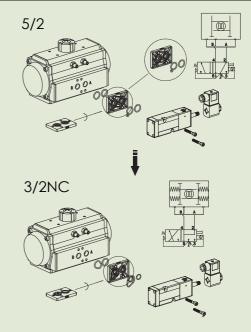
Non-standard installation diagram and photo of NAMUR solenoid valve (air port facing down)
